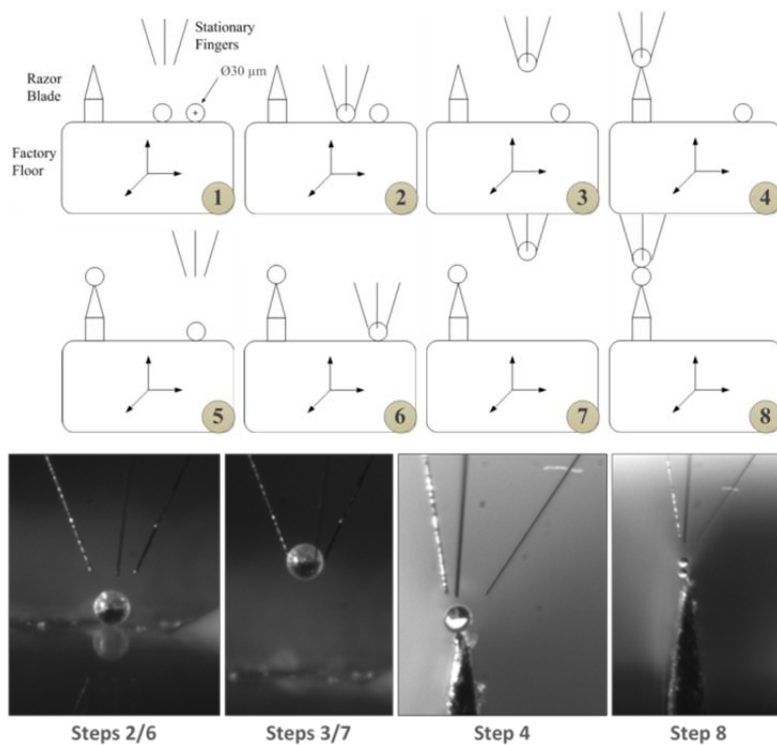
Assembly of two stacked glass spheres mounted onto the edge of a razor blade; Upper figure shows sequence of assembly, lower photographs showing images during assembly.
